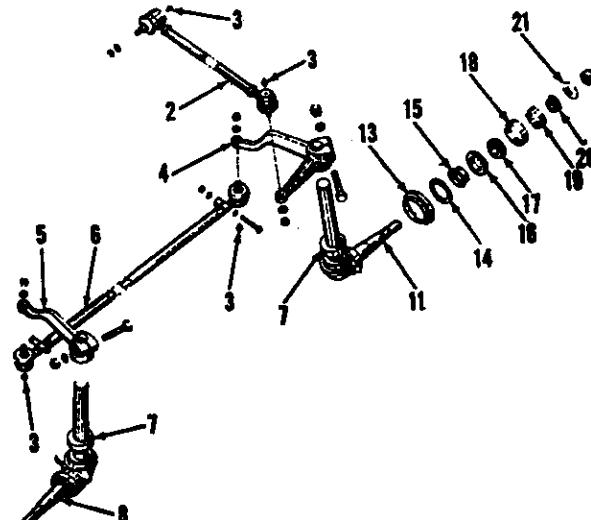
Exploded view of Series B-275, B-414, 354, 364 and 384 steering knuckles, steering arms, tie rod and drag link used on models with no power steering. Models with power steering are similar.
